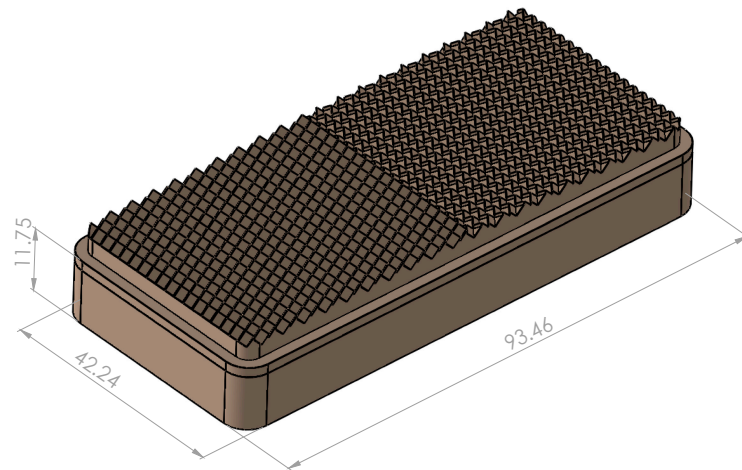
Reflector’s core tool insert, dimensions in (mm).
